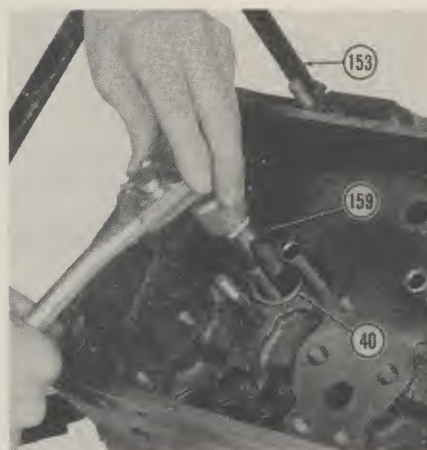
A—GM engine. First step in removing an injector hole copper tube (40) is to cut $\frac{3}{4}$ inch of threads in tube using a thread tap, GM tool J5286-2 or equivalent.
